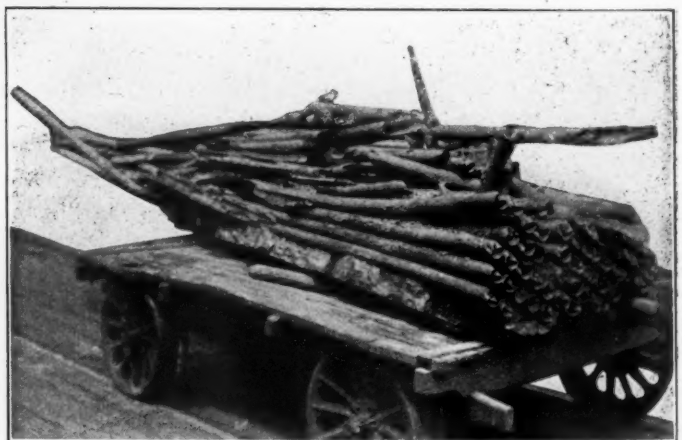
Mass of Tubes and Solid Matter Taken from Bottom of Boiler Just Back of Injector Checks
